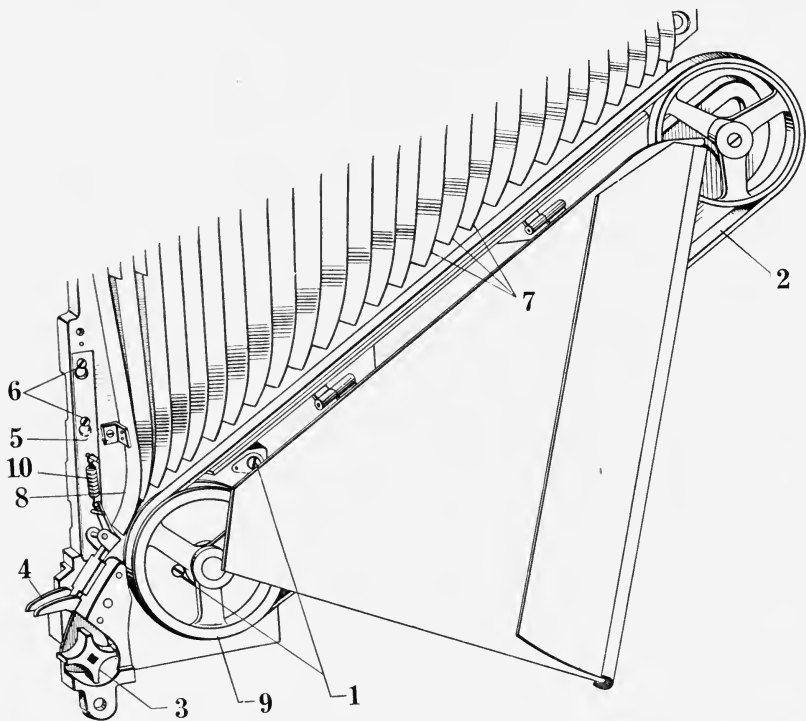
First Style Flanged-Pulley Assembler. This type assembler eliminated the conventional chute rails, which were displaced by a wide curved plate extending from the matrix belt to the star wheel. The “dead space” between the belt and the assembler star was shortened about one-half inch, which greatly improved matrix assembly.
